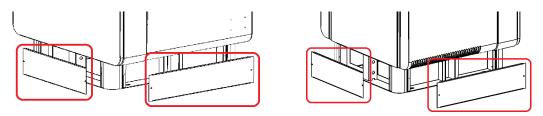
Schematic diagram of sealing plate before and after charging pile
